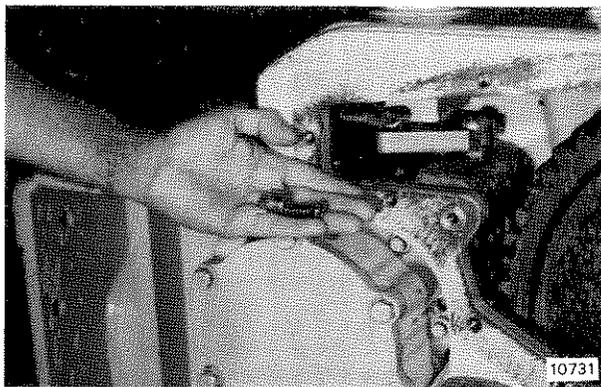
INSTALLING THE INTERMEDIATE GEAR AND THE FREESPOOL SHIFTING FORK (Page 1 of 4)
